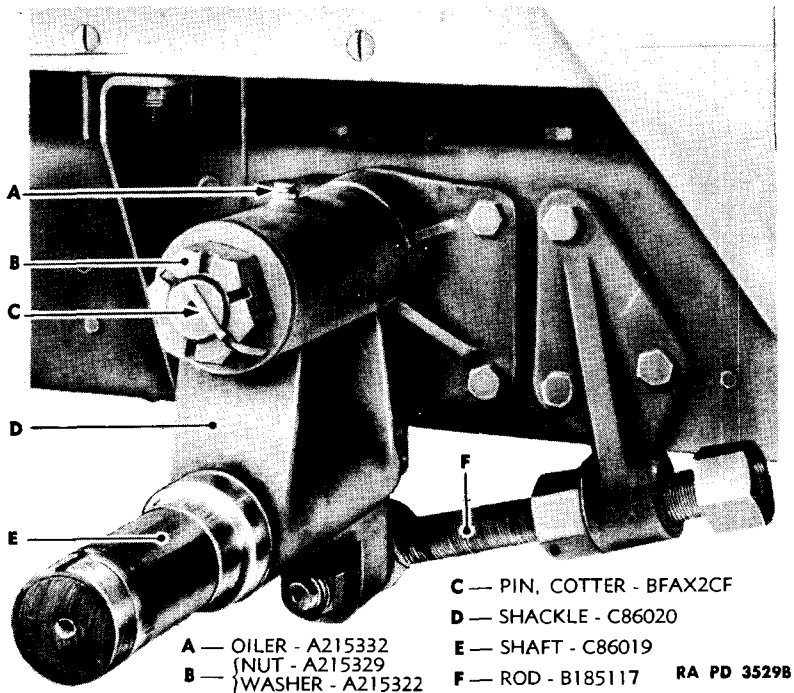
Track Adjusting Idler Shaft and Bracket—Installed
